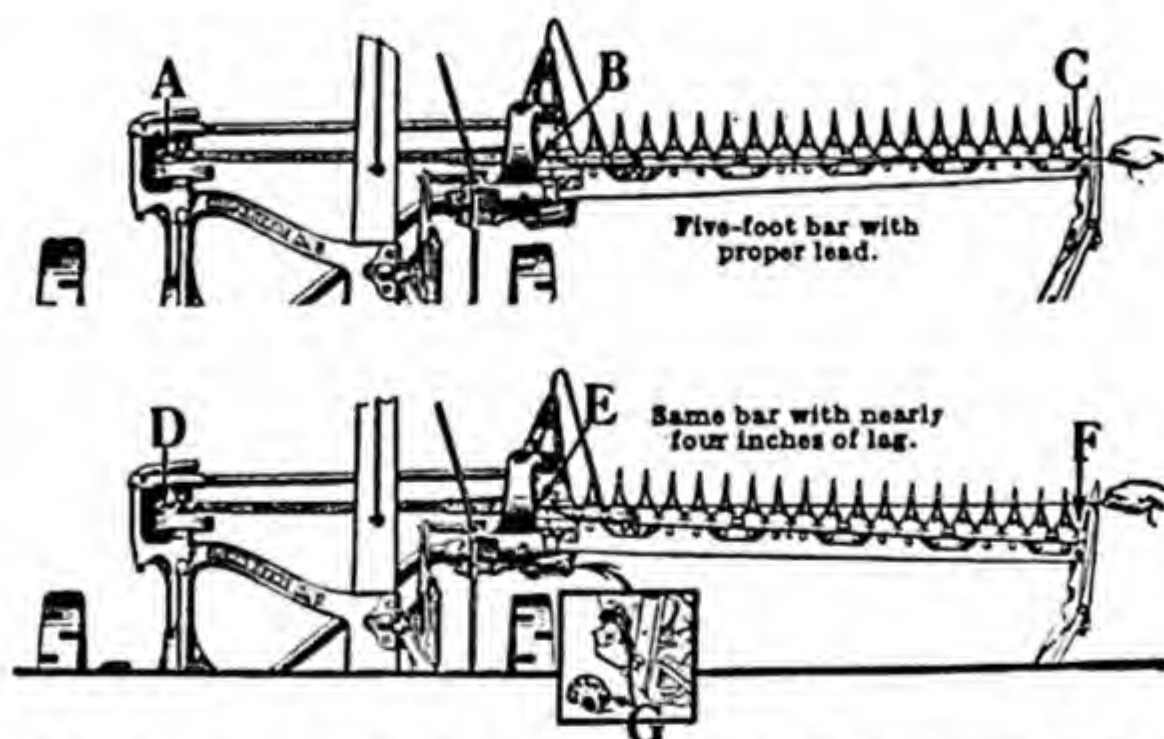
How to measure the lead of a cutter bar for proper alignment. Point C should be from 1 to $1\frac{1}{4}$ inches ahead of points A and B. Points D, E, and F show a cutter bar with too much lag at F.
